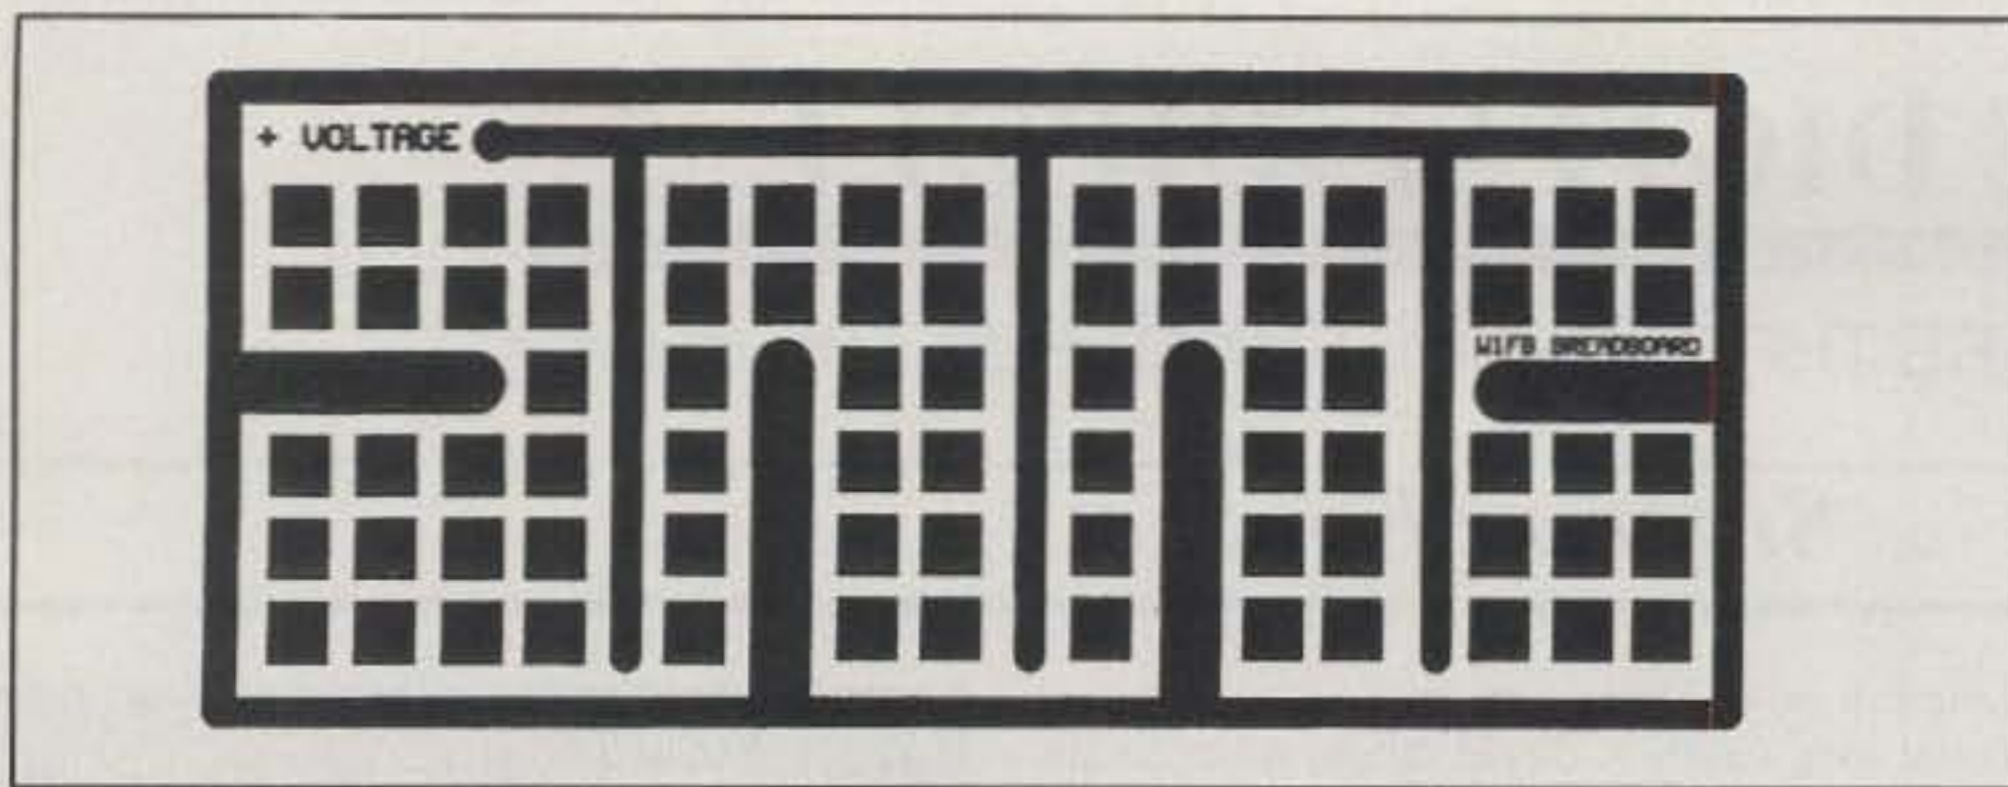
Scale etching pattern for the general-purpose PC breadboard.
